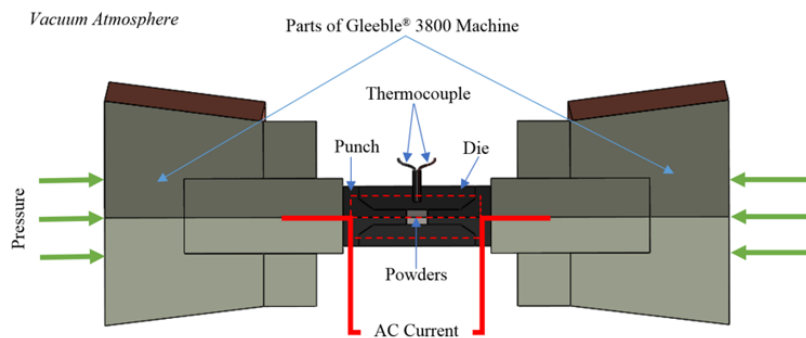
Schematic drawing of the Gleeble-3800 machine and Illustration of the Micro-FAST sintering and forming process
